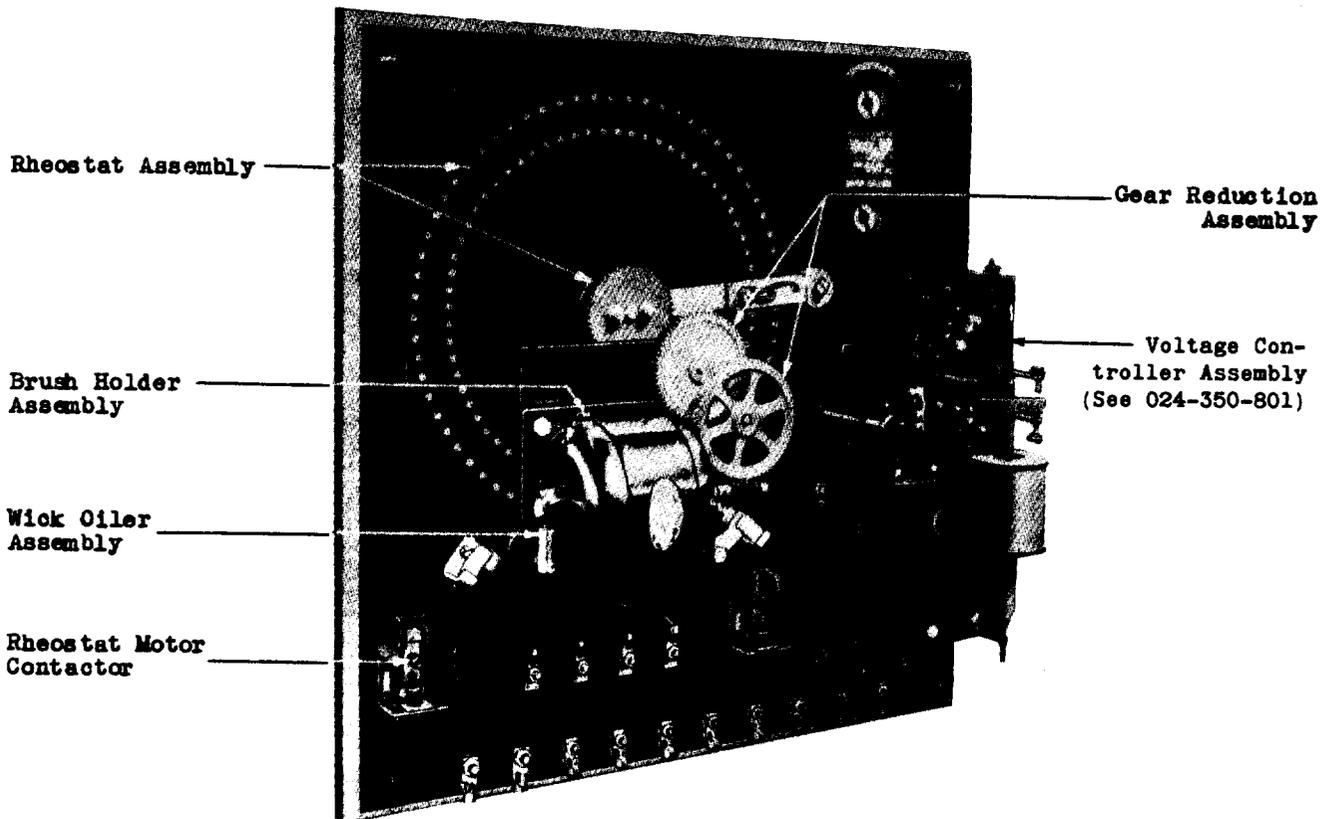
AC Rotating Cam Type Voltage Regulator KS-5468
